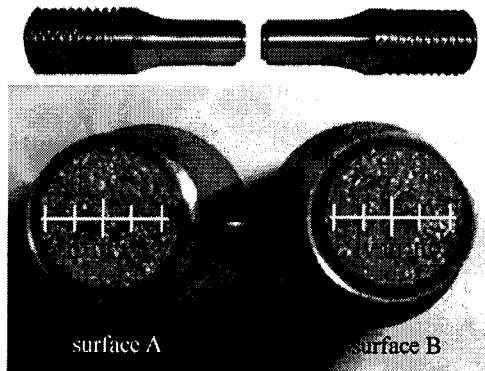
Macroscopic fracture surfaces of U-notched specimen broken in tensile.
